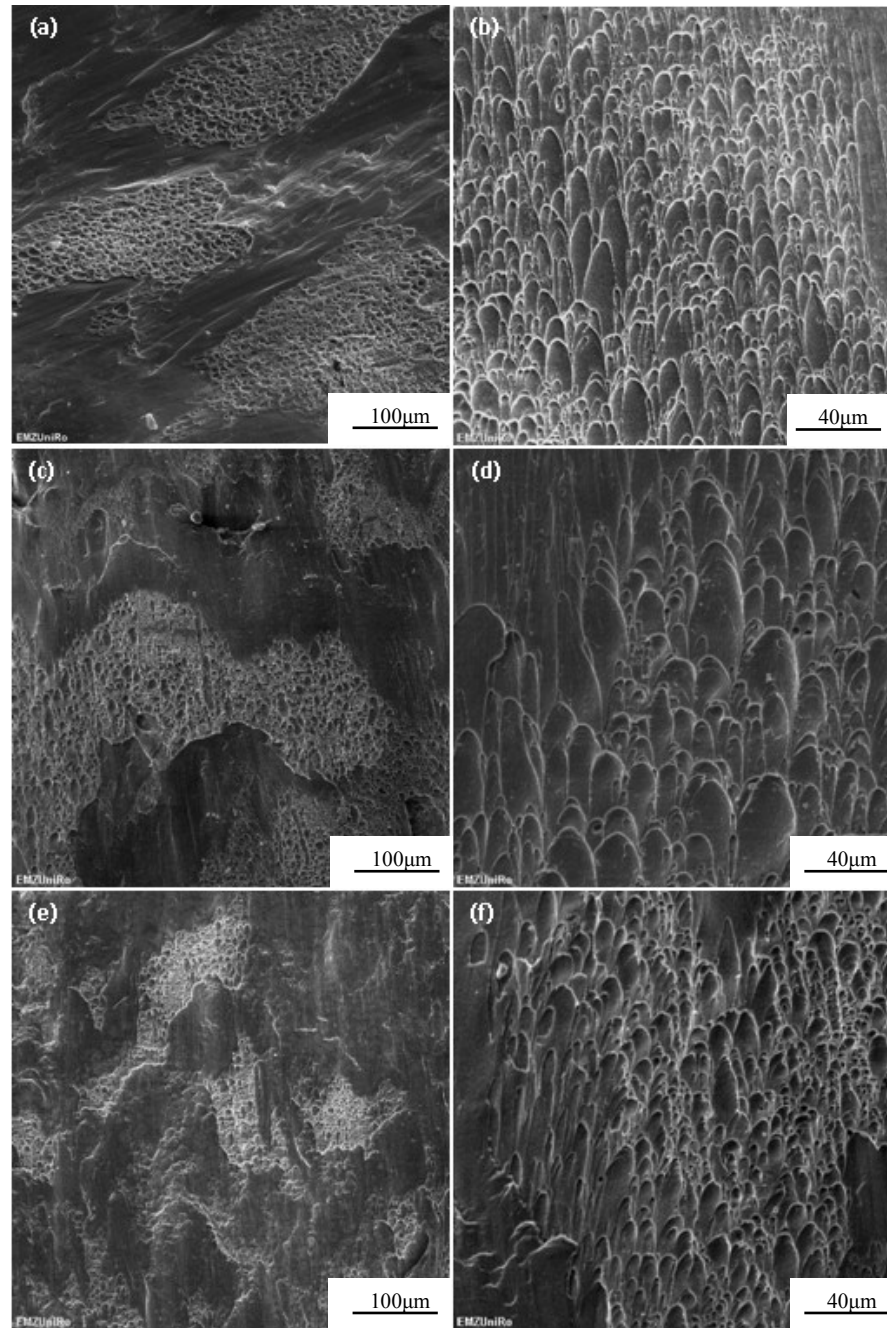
Fracture surface of the Ti-6Al-4V specimen sintered at 850°C (a) and (b) the enlarged image of the dimple region in (a); Fracture surface of the specimen sintered at 950°C (c) and (d); (e) and (f) are the fracture images of specimen sintered at 1050°C.
